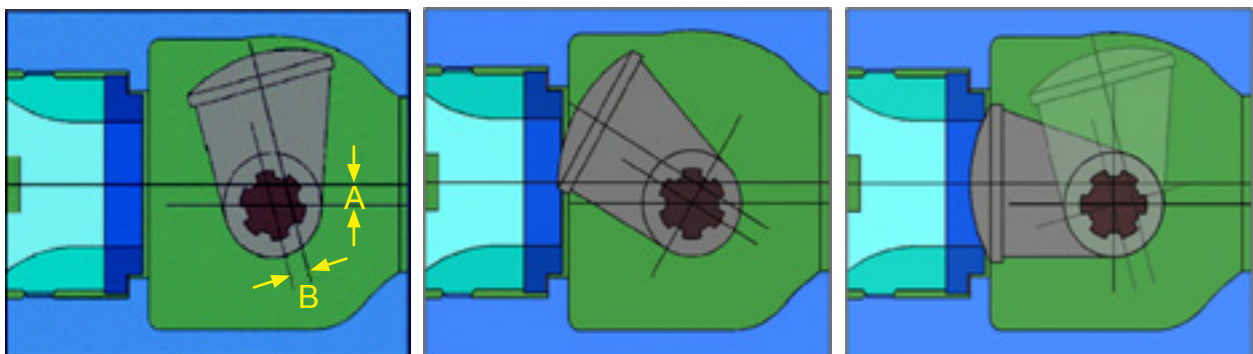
2: Sectional diagram: Plug movement with double eccentric bearing
